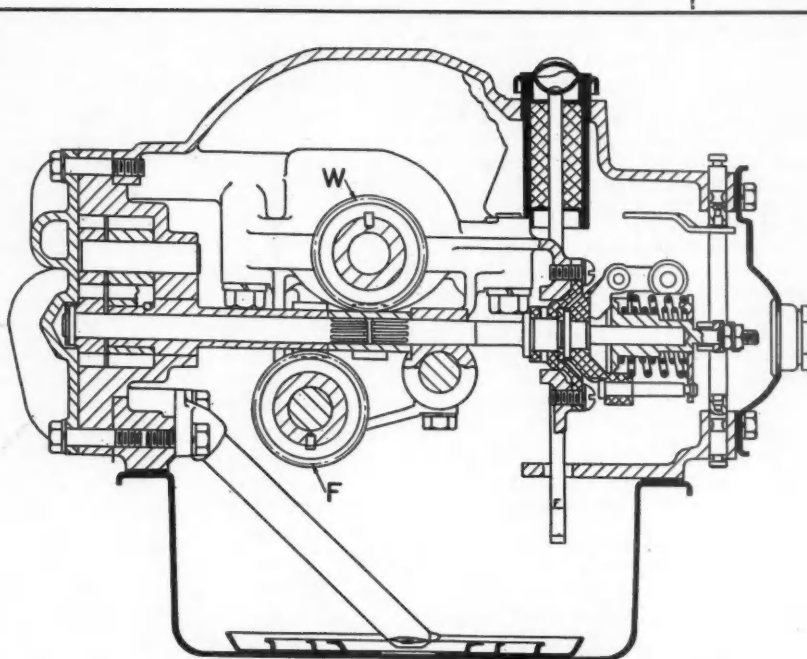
Section through two-unit oil pump and two-stage governor, with drive therefor
